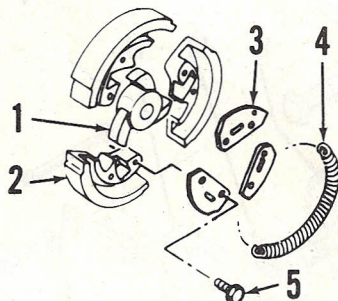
Exploded view of clutch shoe assembly used on Model SP80.
